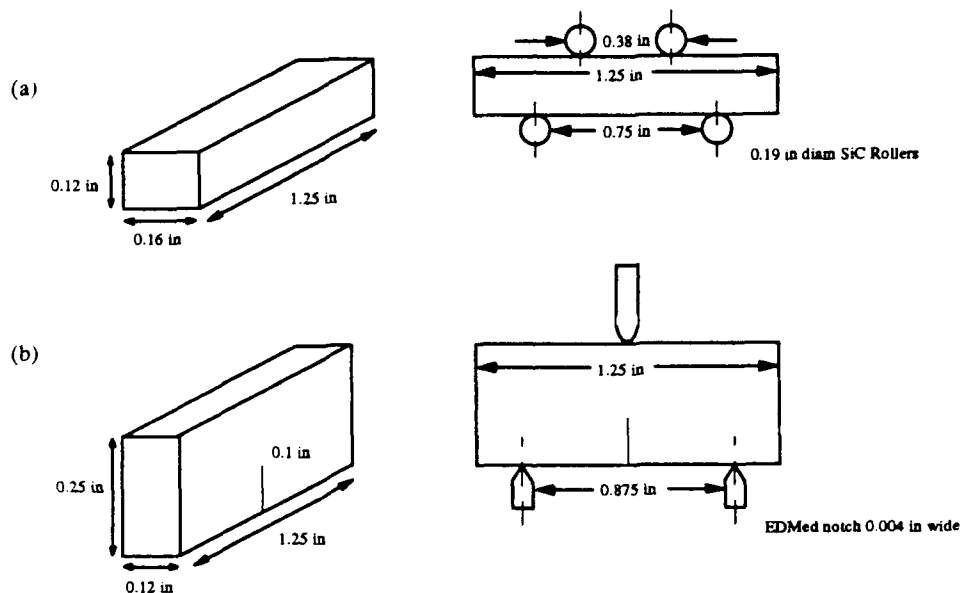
Typical specimen dimensions used in this program for (a) four-point bend testing and (b) three-point fracture toughness testing.
